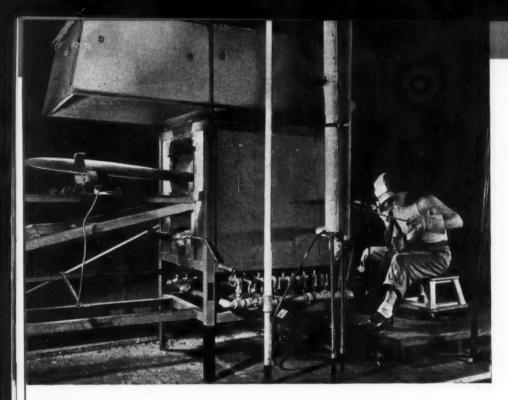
Inside of the Seams Close to Shank are Brazed, Using an Oxy-acetylene Torch
